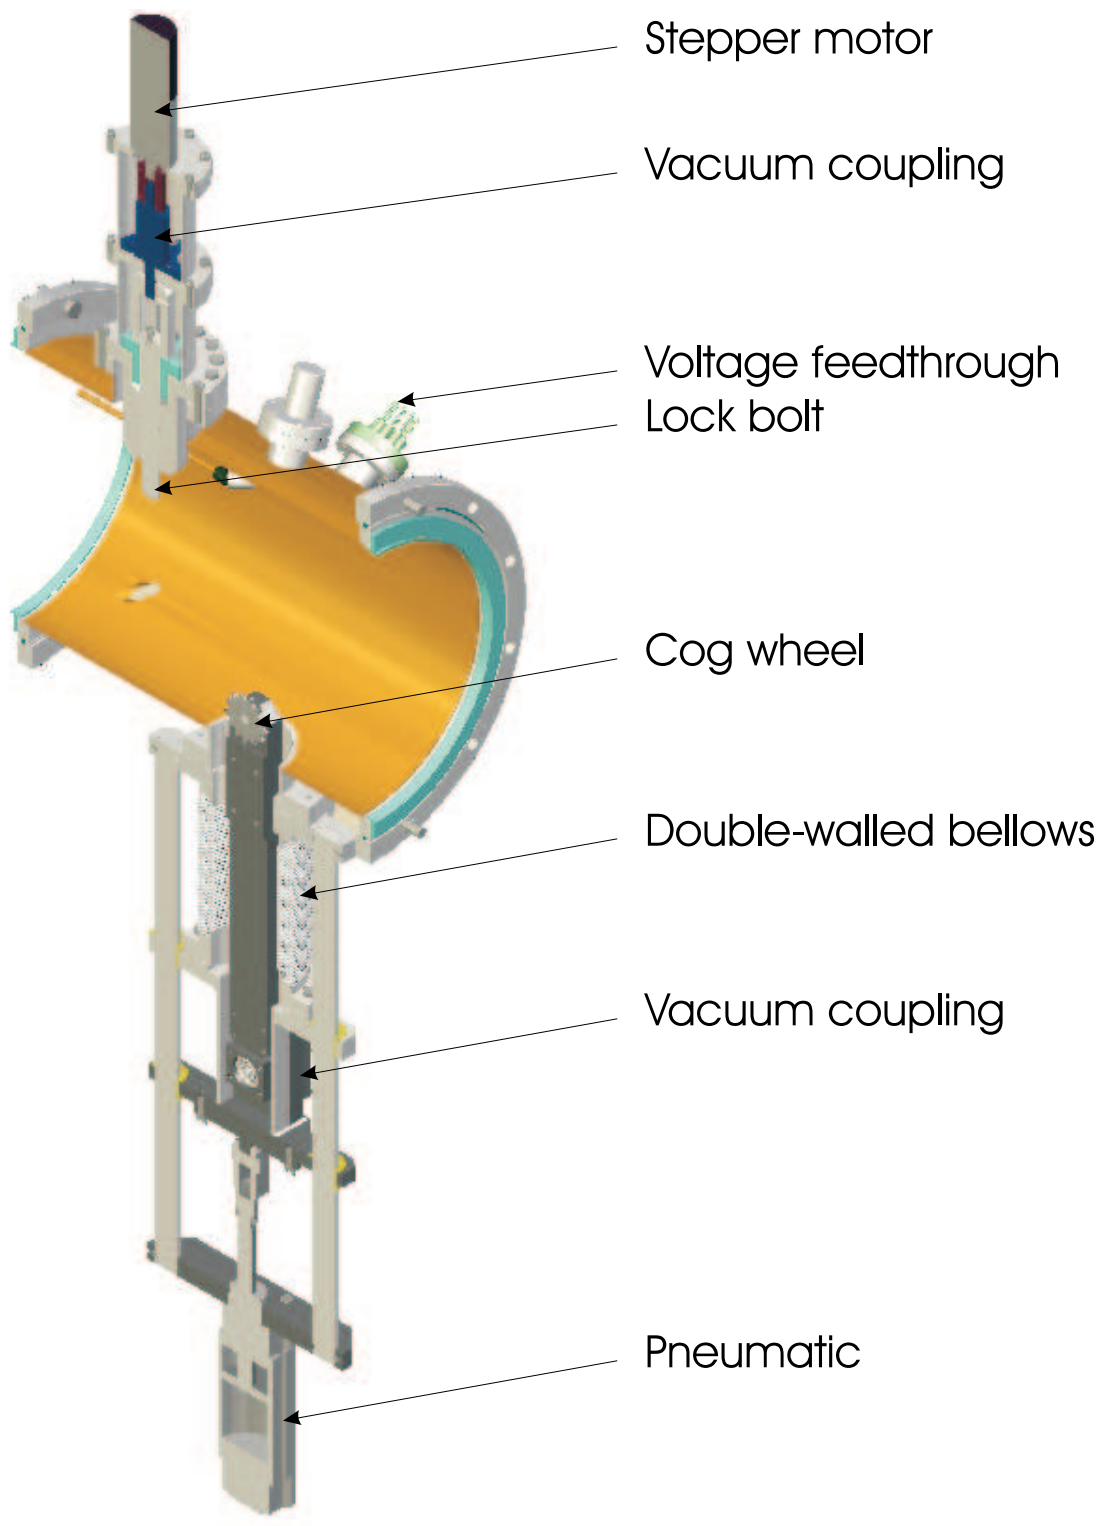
Technical drawing of the supply section including the locking mechanism.
